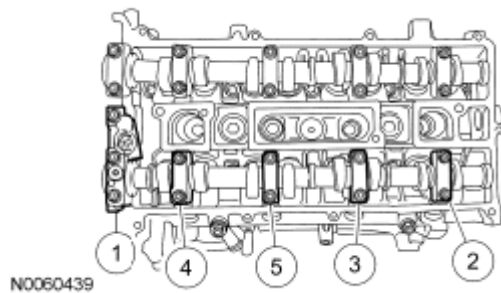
Identifying Camshaft Bearing Cap Bolt Loosening Sequence
